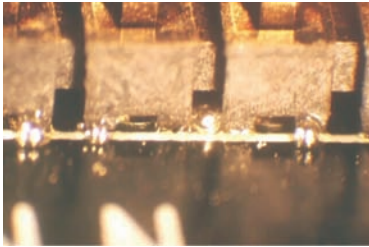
Solder balling caused by paste being trapped between the circuit board and the connector.
